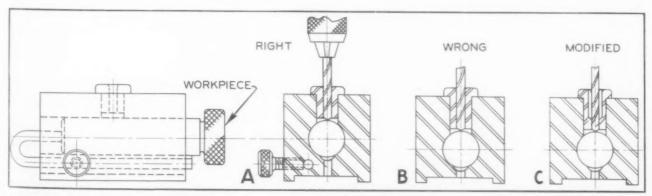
Drill jigs for stainless steel, of which a simple type is shown at A, should be provided with short drill bushings, as suggested at B. The bushing shown at C would be too long; however, it can be relieved, as shown at C. Because the material is tough, drills should be short since long drills tend to flex and, therefore, will eventually break.
